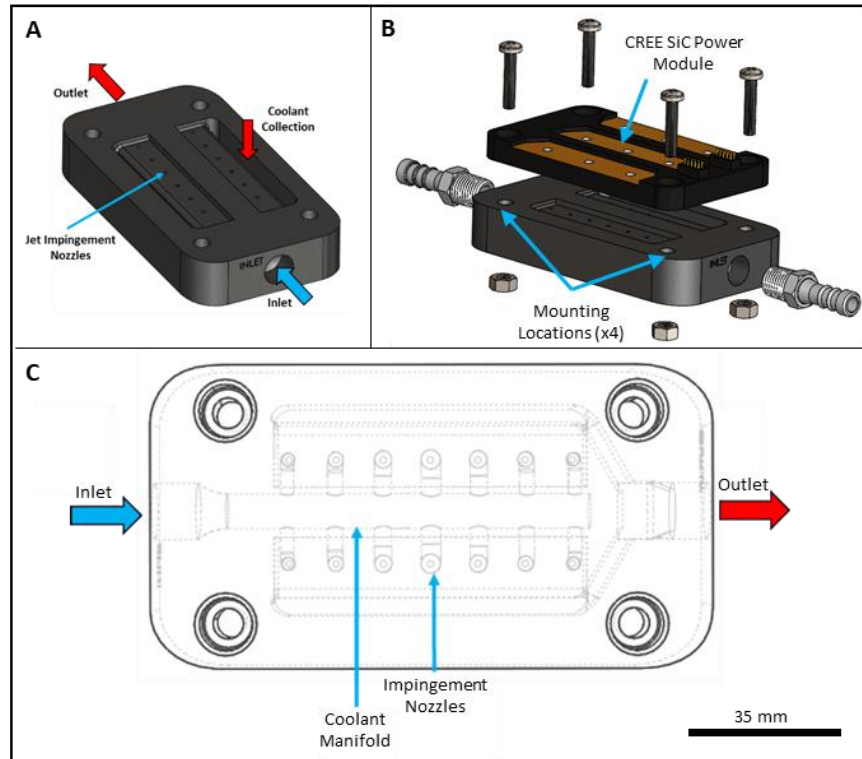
A) isometric view of the impingement cooler. B) method of attaching the cooler to the SiC power module. C) transparent view of the cooler showing internal coolant routing paths.
